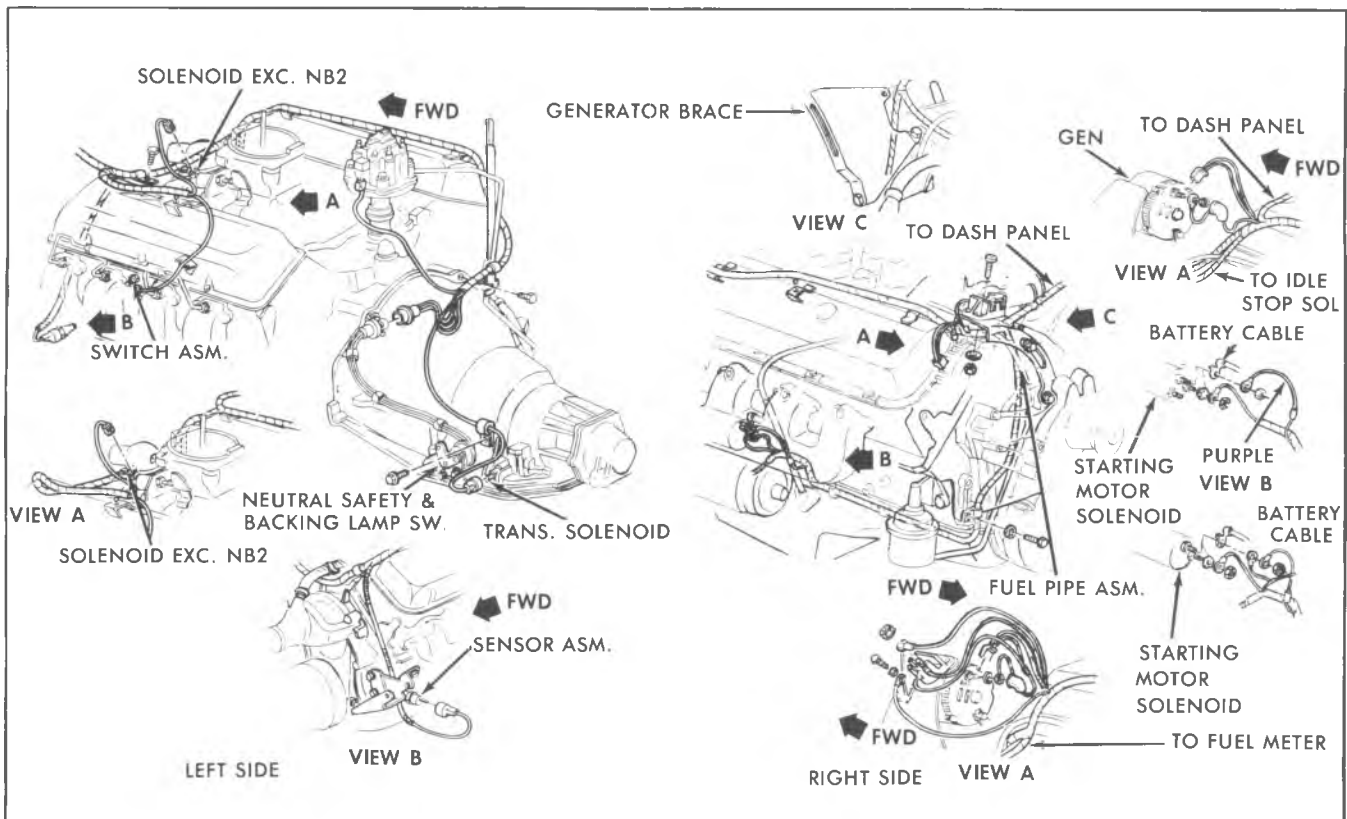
P-30 Truck V-8 (LF8) Engine Wiring
